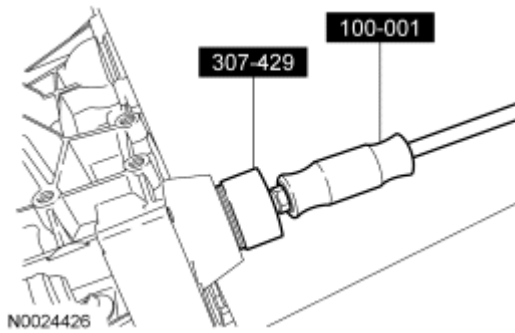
Removing RH Differential Seal Using Special Tools (1 Of 2)
